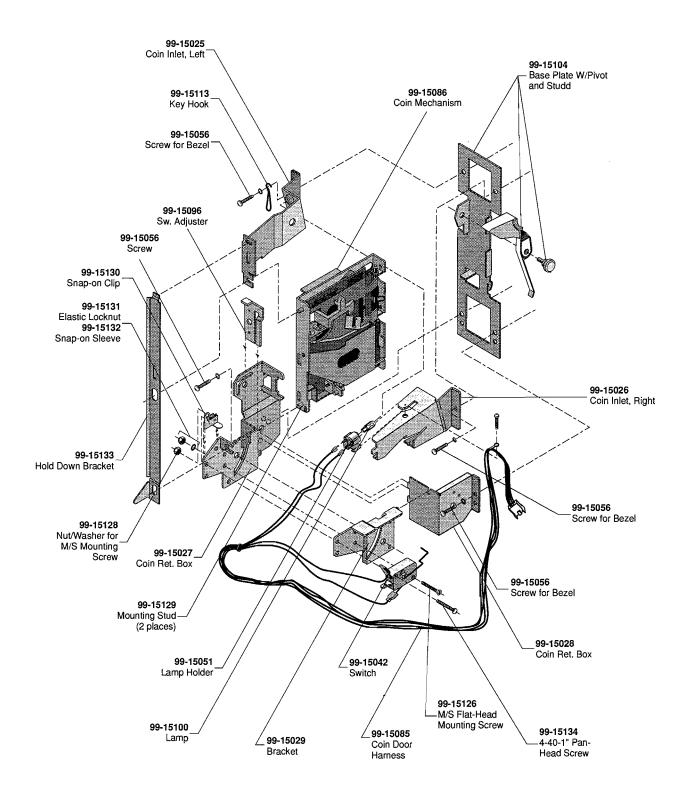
Four-Entry Coin Door Assembly 171101-001
